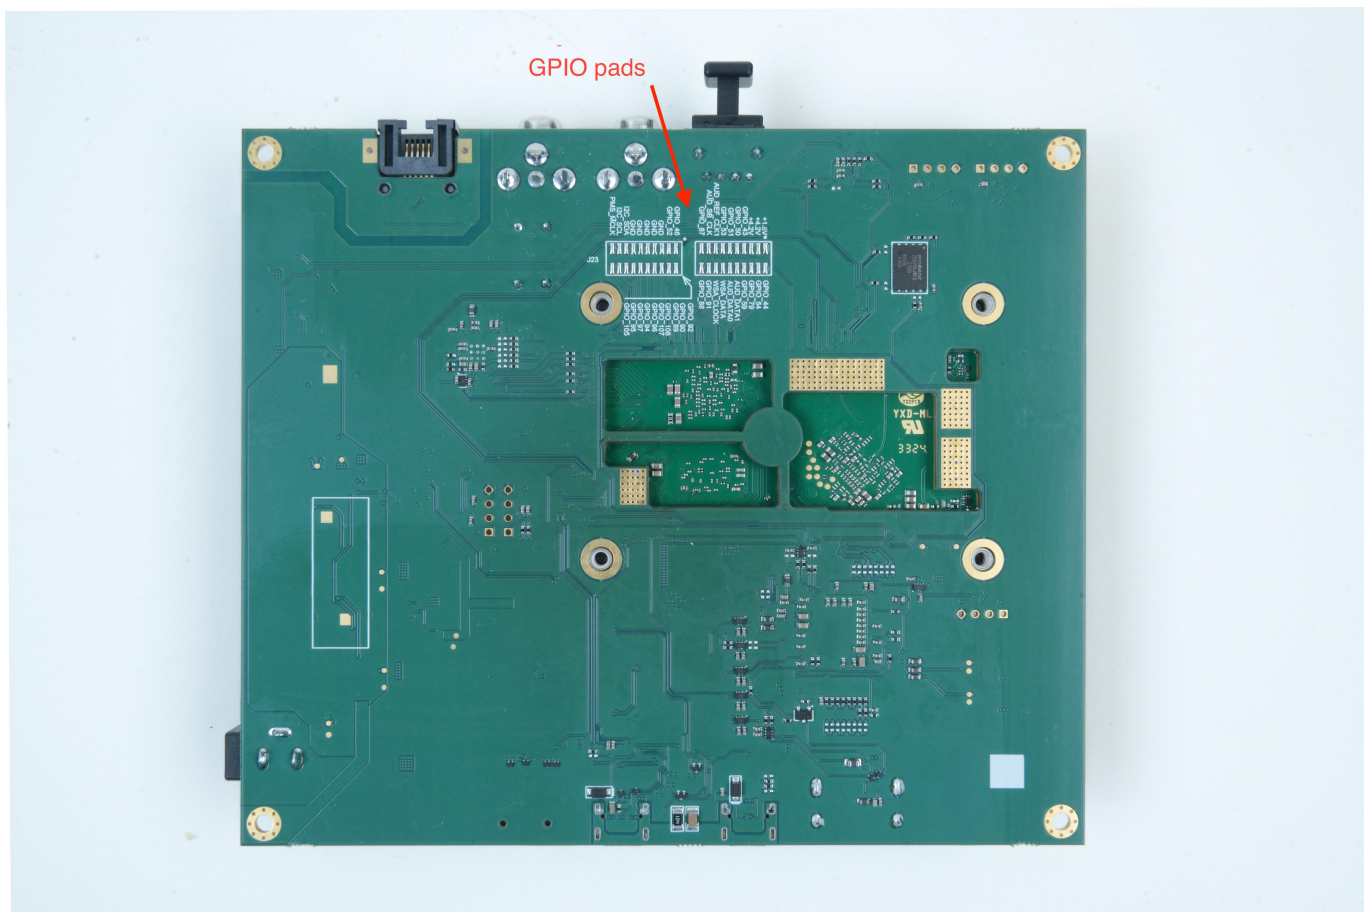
TobuFi-DVK rev3/rev4 board bottom view components
